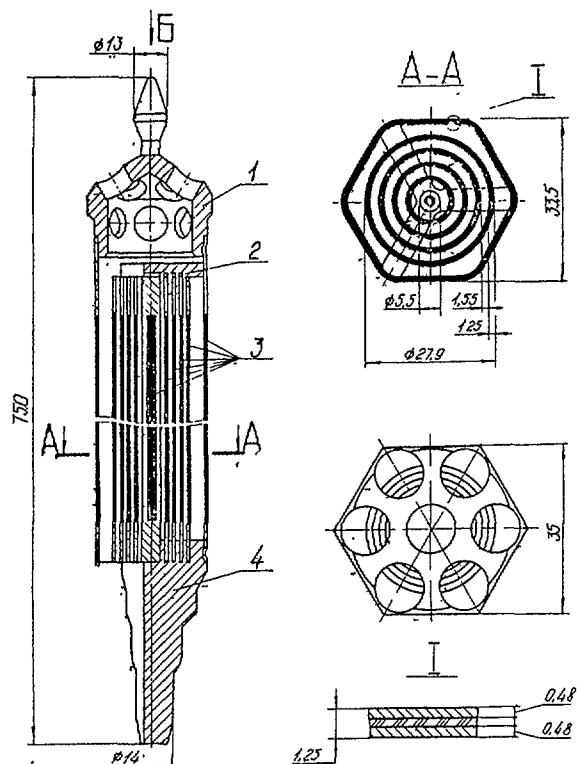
Fuel assembly of the VWR-M reactor; 1 – cap; 2 – upper grid; 3 – fuel elements; 4 – ending part.
